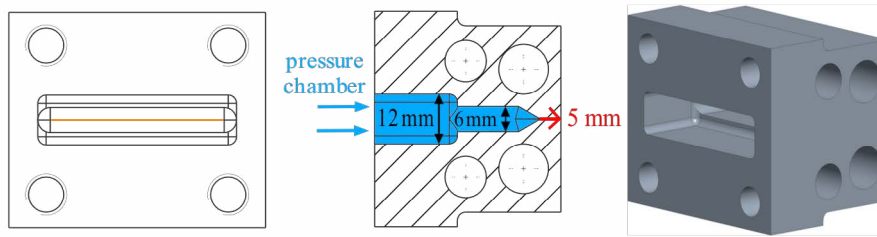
Proposed test specimen in [4]. Test specimen contains four threaded holes, a pressure chamber (blue), a notch (orange) and four relief holes. The ligament of the uncracked specimen with a length of 5 mm is shown in red.
